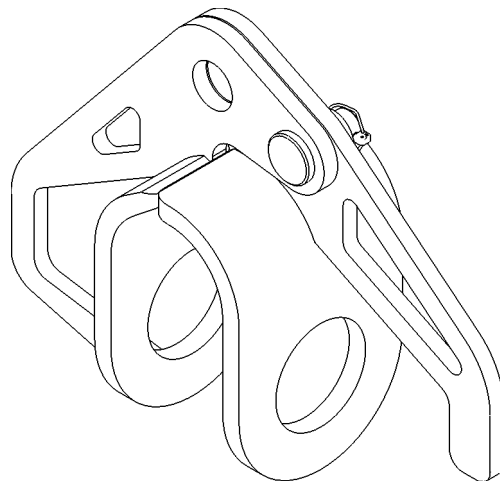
Forks in front of reducing adapter (illustration of principle)
